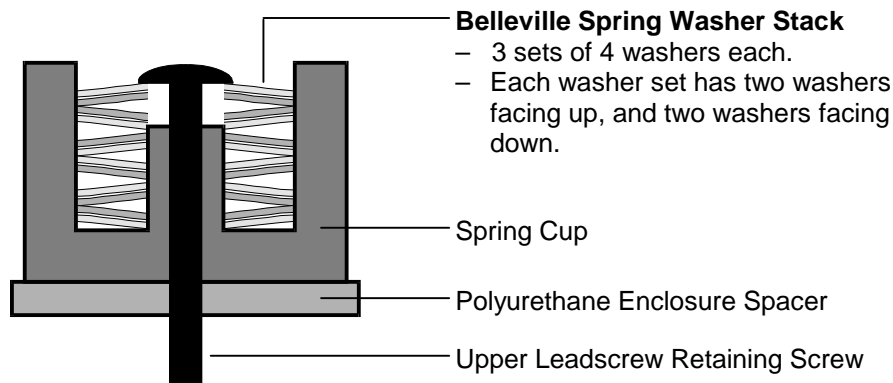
The Spring Cup Assembly and Enclosure Spacer
